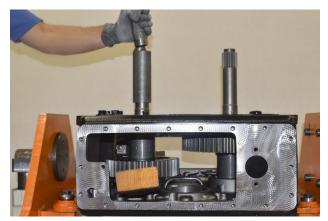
Prevent gear from moving and tap out 1/3 shaft.
